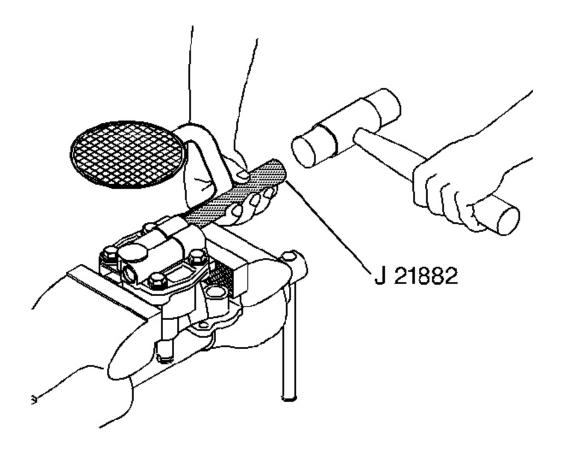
Installing Oil Pump Screen Into Pump Body Courtesy of GENERAL MOTORS CORP.
